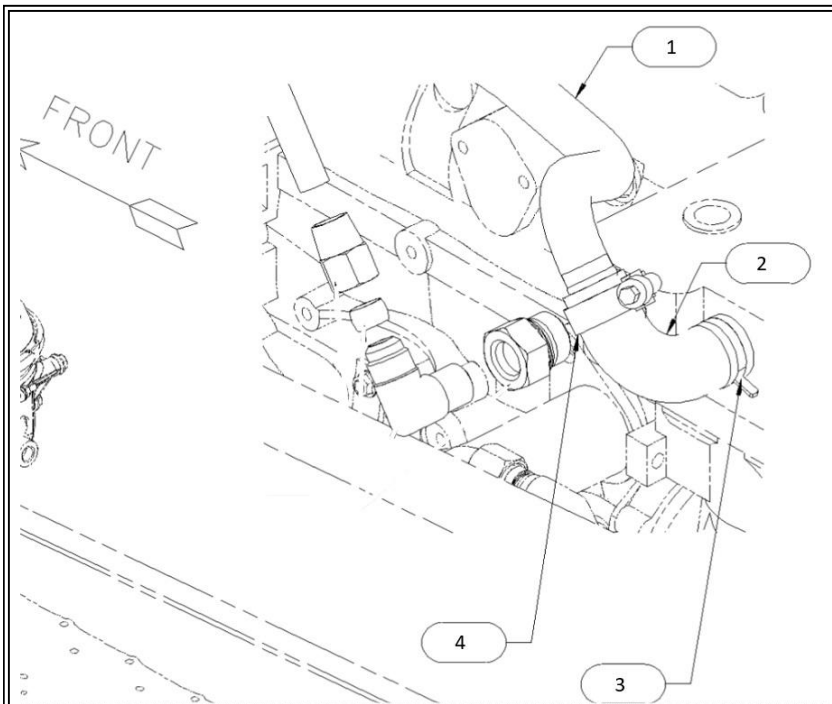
CAC to Air Compressor Intake Pipe and rubber elbow
